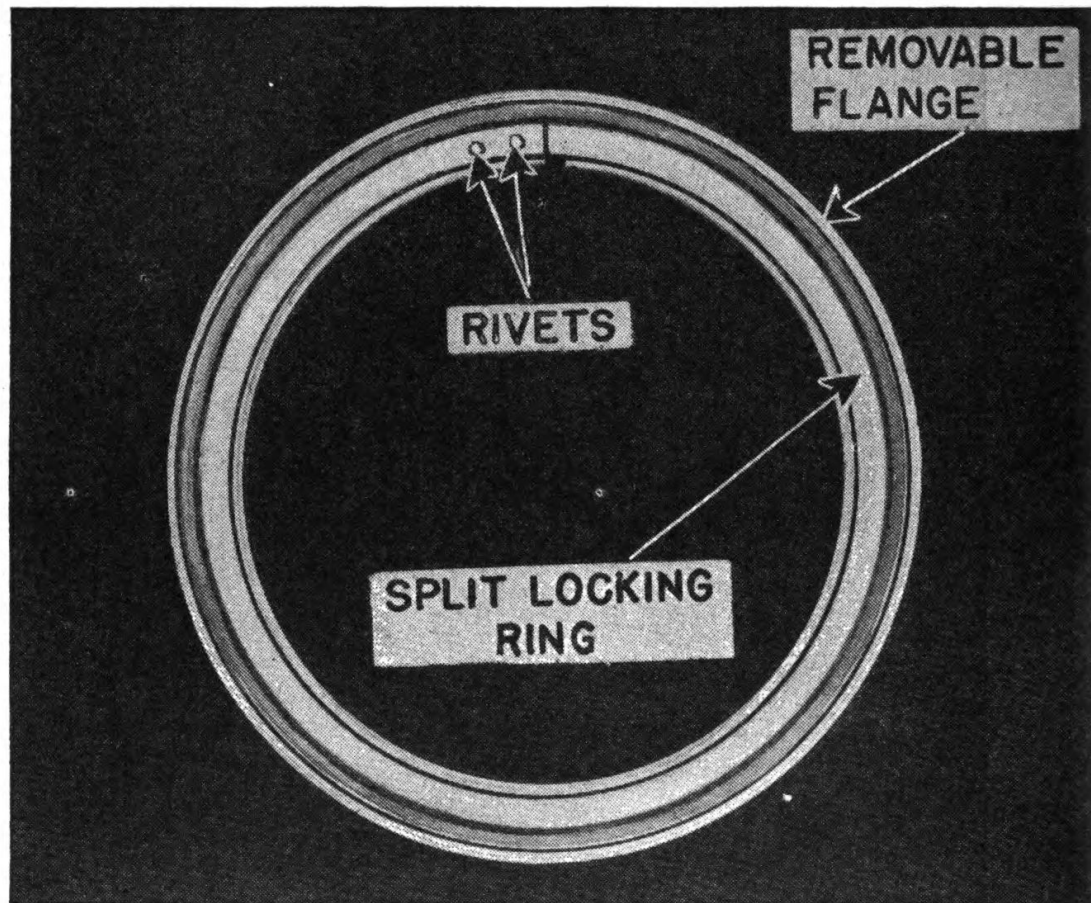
Two-piece-ring removable flange, locking ring removed.
